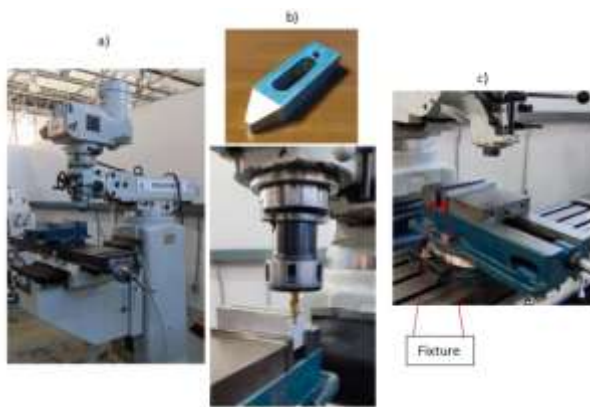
(a) UPIIG-IPN milling machine (b) types of machining performed with the milling machine (c) fixture type tool in the milling machine [1]
